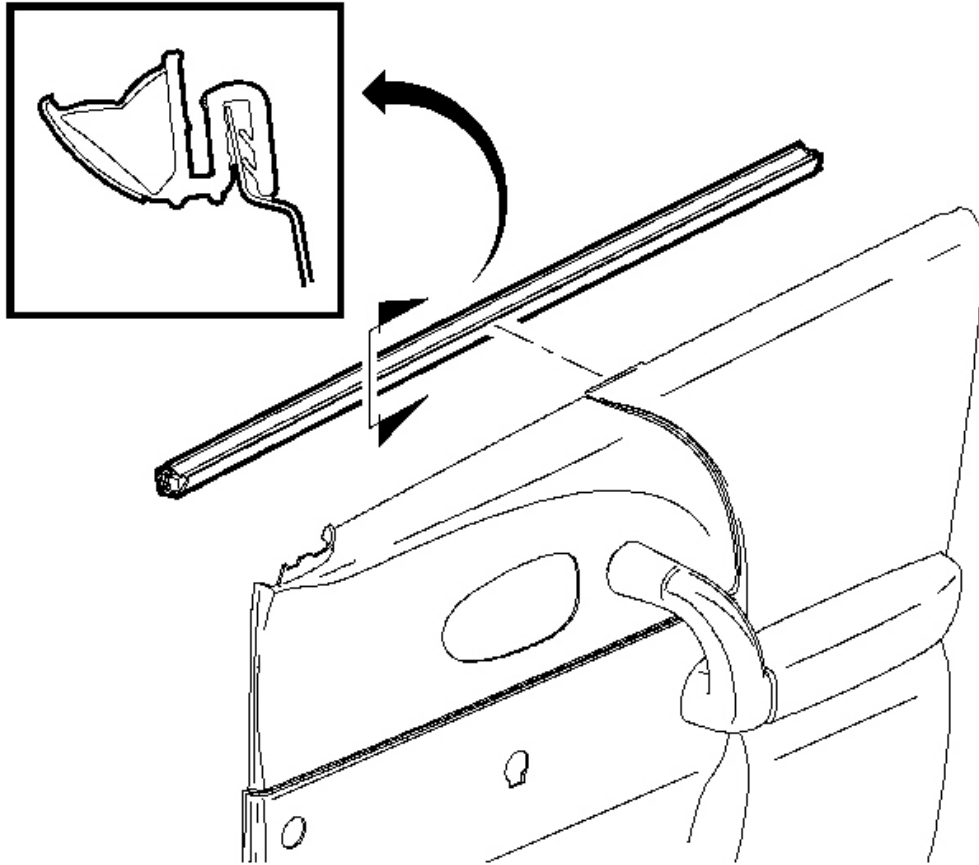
View Of Front Door Window Inner Belt Sealing Strip
